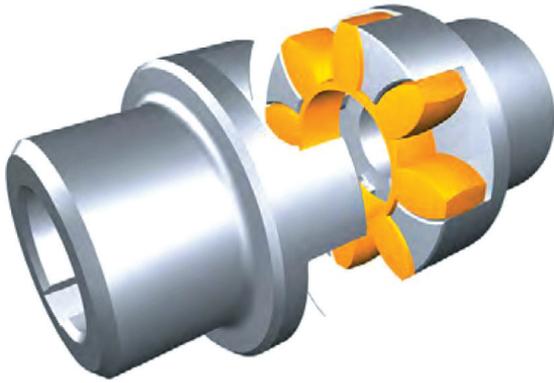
One insert flexible coupling SP (ASR) [7, 8]
